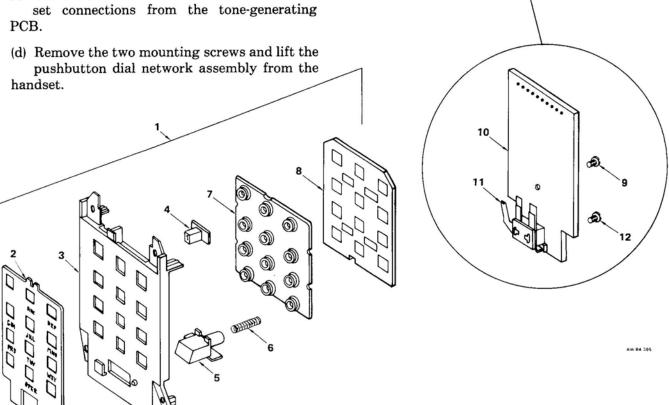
Model 185462 Pushbutton Dial Network Assembly, Exploded View
